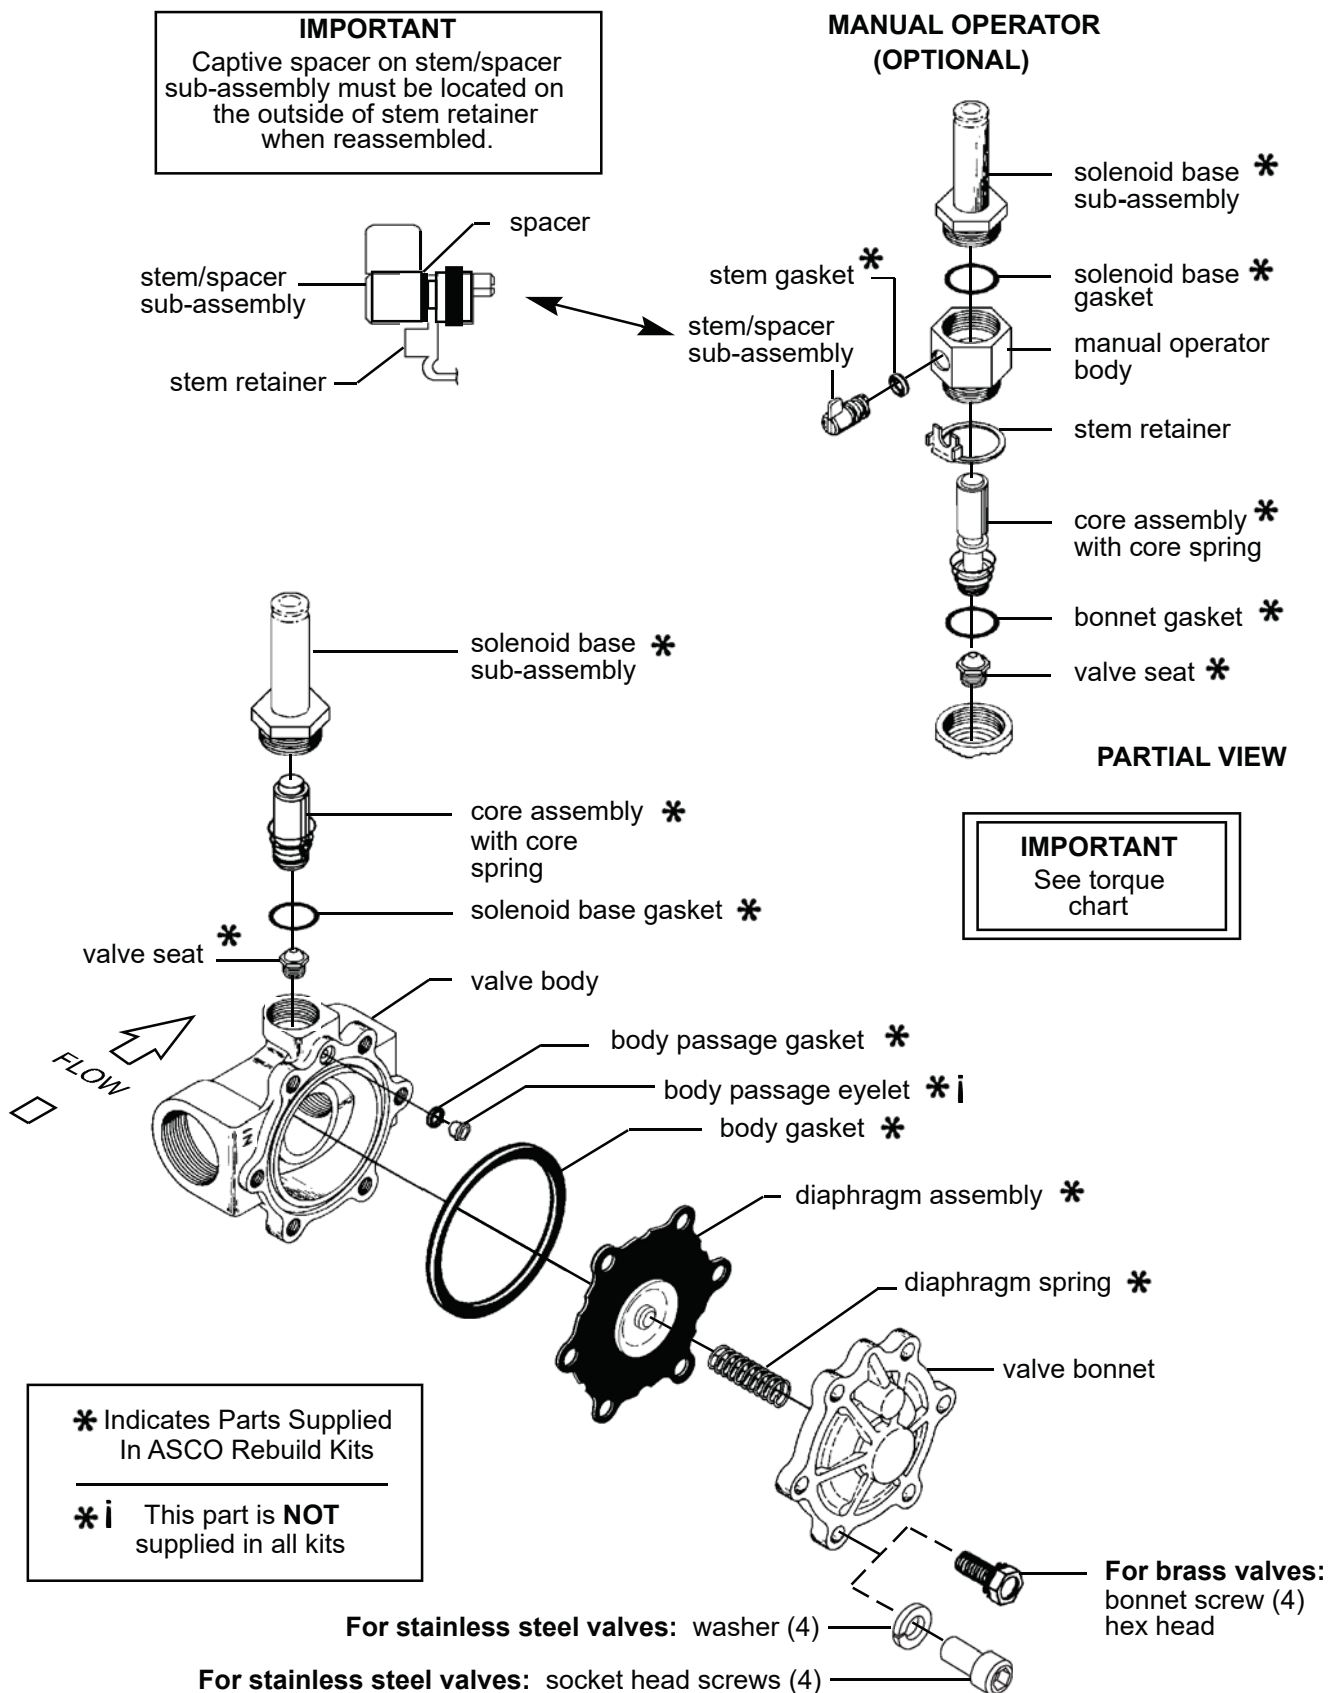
Series 8210 valve without solenoid, DC construction with 1 1/2" NPT valve body shown.
